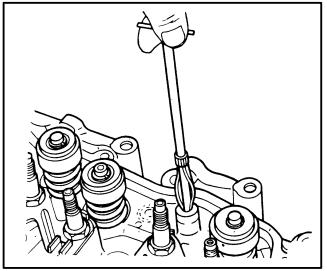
TOOL FOR CLEANING THE VALVE GUIDES
